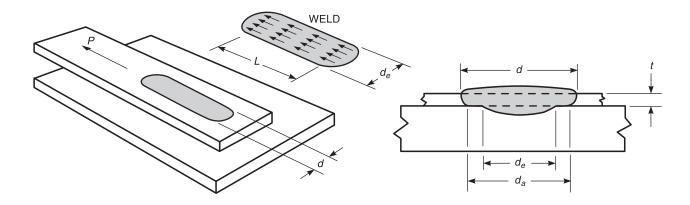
</u>—Arc Seam Weld in a Supporting Plate
